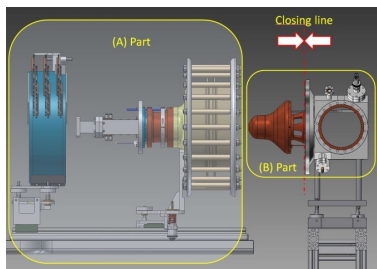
PS-ESS assembly schema. The solenoid and plasma chamber with extraction electrode chamber can be slid to gain fast access to all parts of this area.
